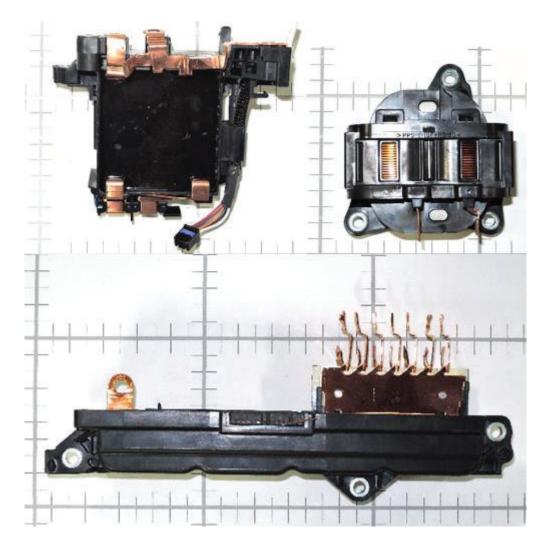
Toyota Inverter: Ferrites & Inductor Group
